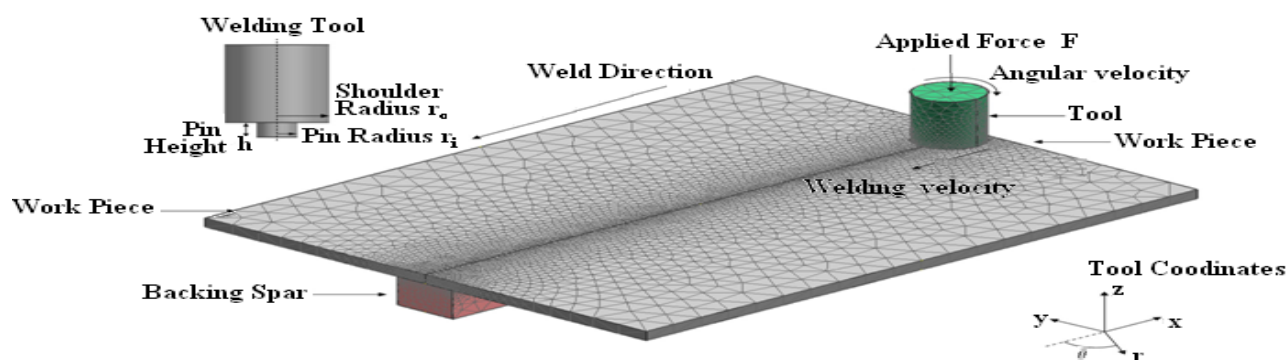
Schematic diagram of a Friction Stir Welding Process [2]
